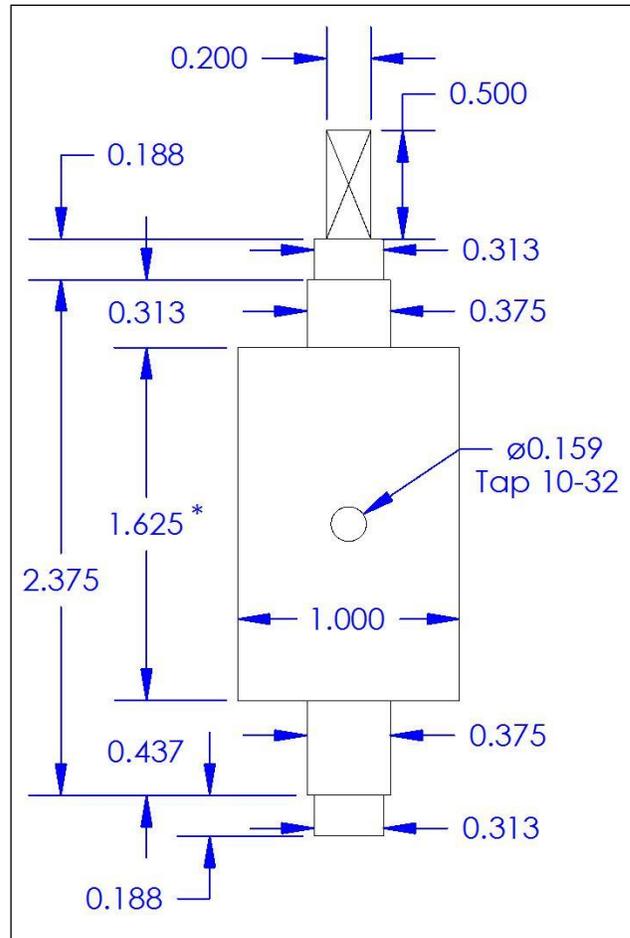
Construction drawing for the main-spring barrel arbor. The dimensions shown are rough estimates of the finished arbor. Most dimensions will be machined to fit various other parts.
